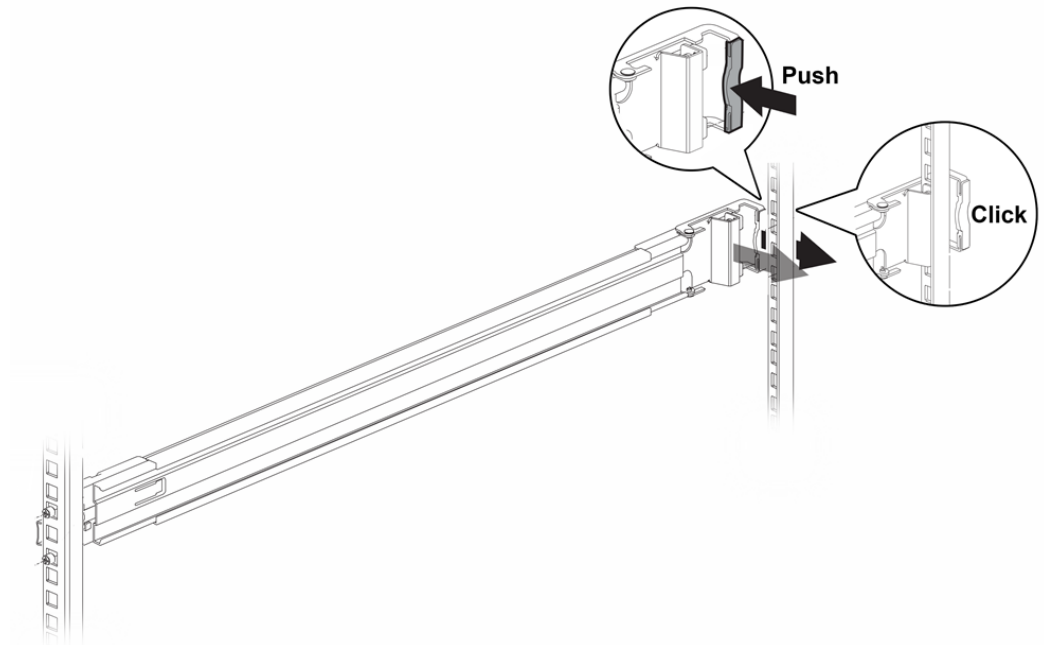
Attaching the Slider Assembly to the Rear Rack Post
